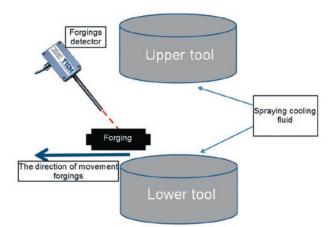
Schematics of the elaborated tool lubricating system, which also assures removing of the scale and drying of the tools
